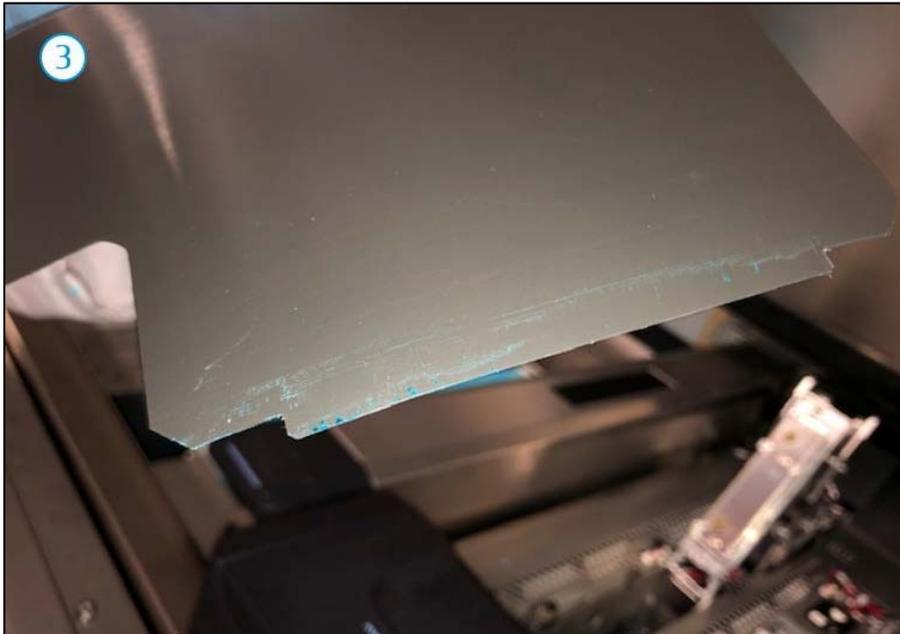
Step 3 in the process of replacing the print head using the new tool
